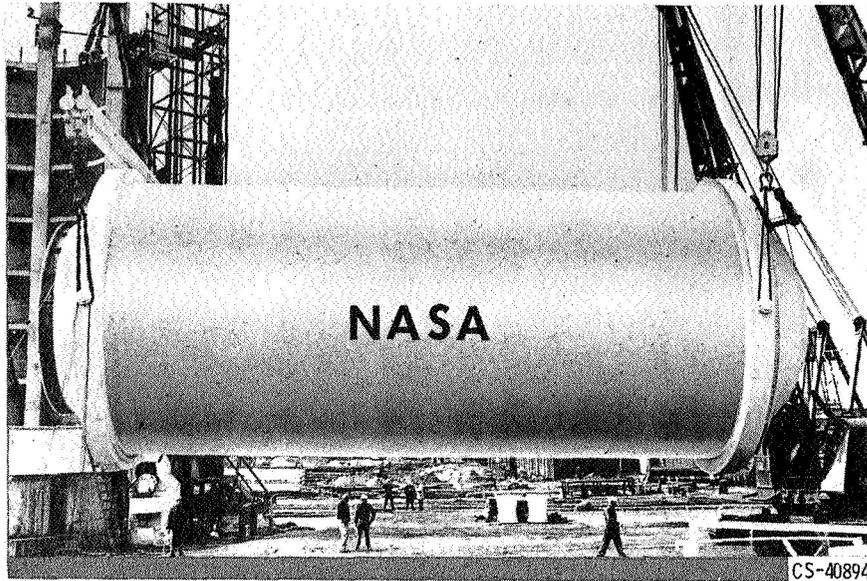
260-Inch-diameter casing manufactured with the use of multiple-pass tungsten-inert gas welding technique.
